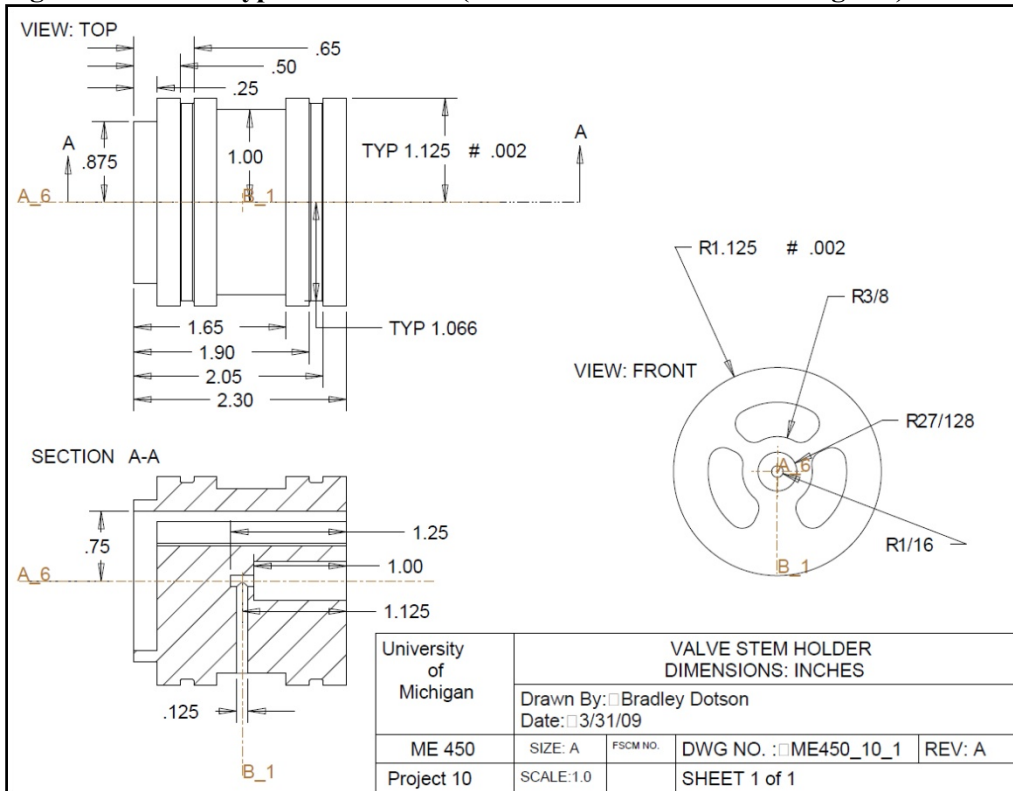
Prototype Stem (Dimensions in Inches and Degrees)
